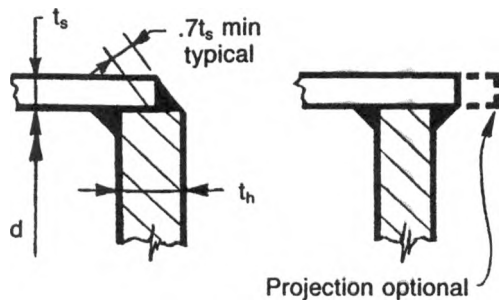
Case 7: Welded flat heads [1, Figure UG-34(e)(f)].
